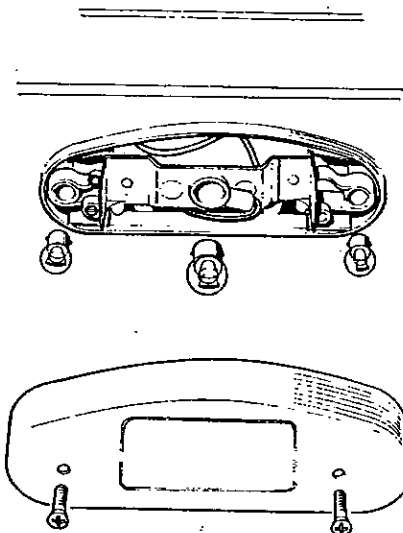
Number Plate and Reversing Light Bulb Replacement
